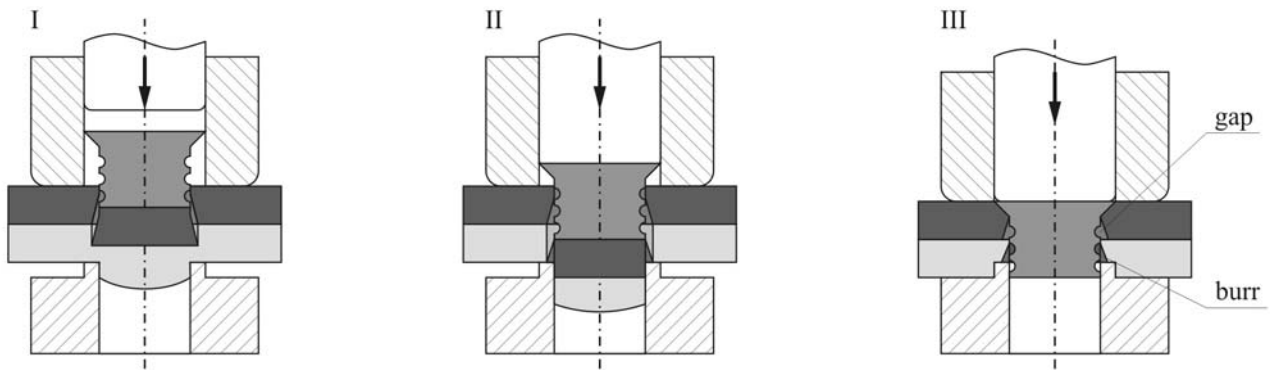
Undesirable burr development during the joining with self piercing solid rivets (schematic)
